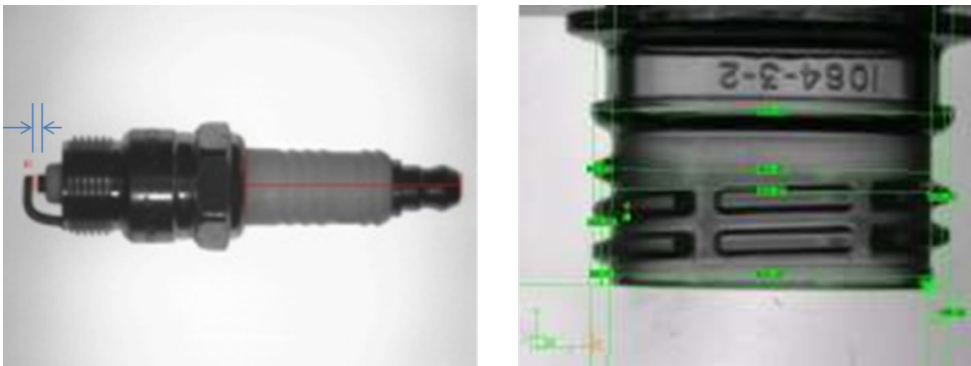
Gauging applications can measure part tolerances to within 0.0254 millimeters.
